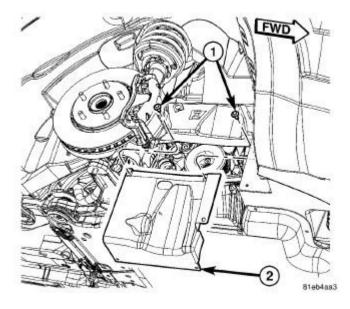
Right Lower Splash Shield Courtesy of CHRYSLER LLC
